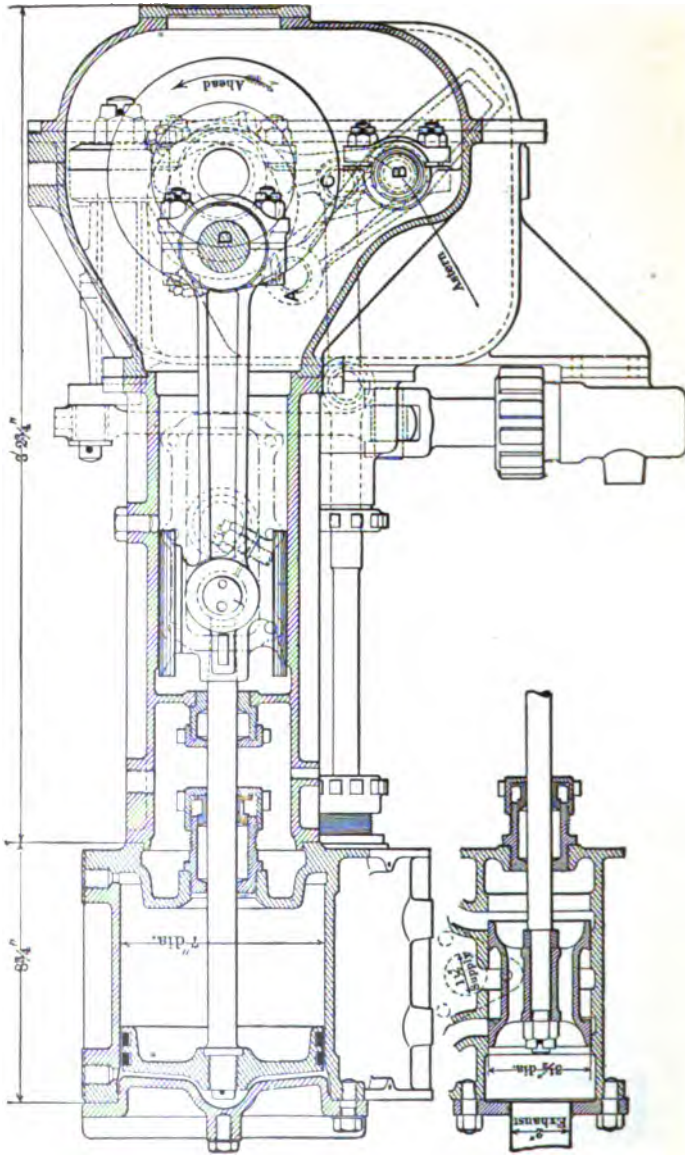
Sectional View of the Thornycroft Compound Steam Engine.
